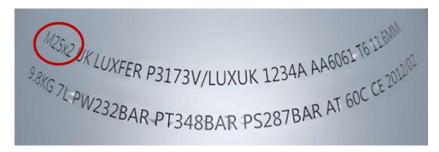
Illustration of cylinder shoulder stamp marking showing threat at left side of top row
